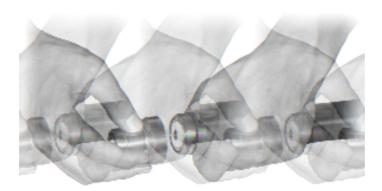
FEEDER EXPANDING EXTERNAL CONDUCTOR
